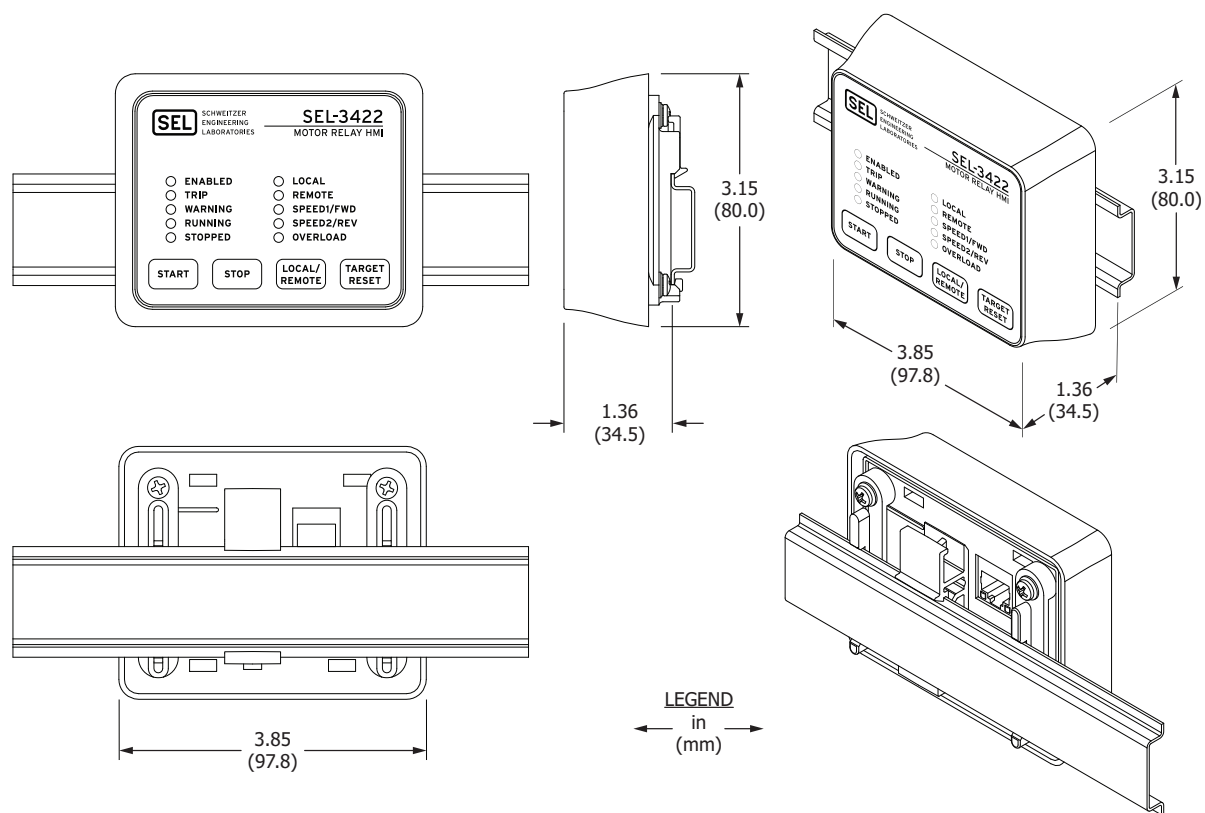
SEL-3422 Motor Relay HMI Installation Drawings (DIN-Rail Mount)
